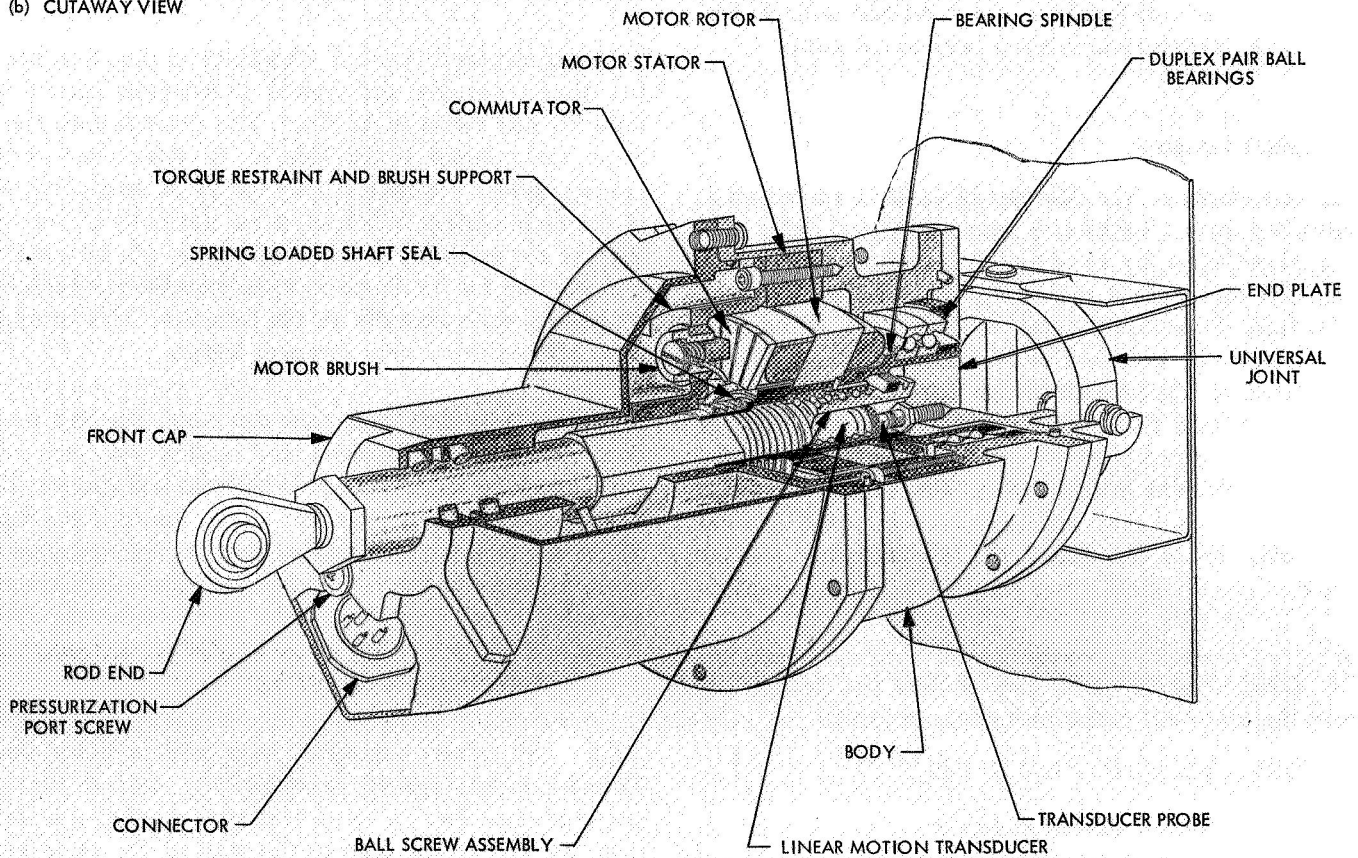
Mariner Mars 1971 gimbal actuator assembly
